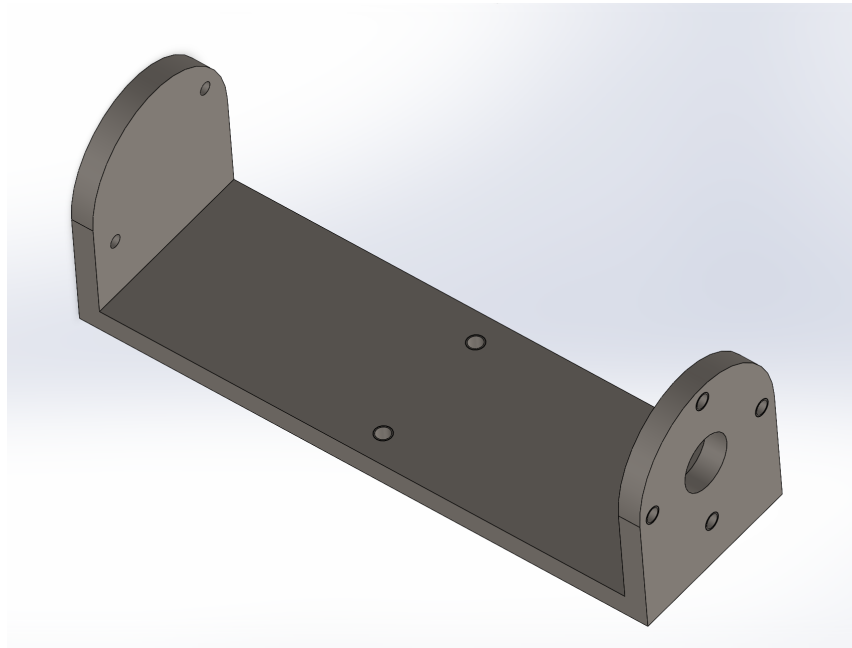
3D representation of the connector between the alignment and the RCM mechanism
